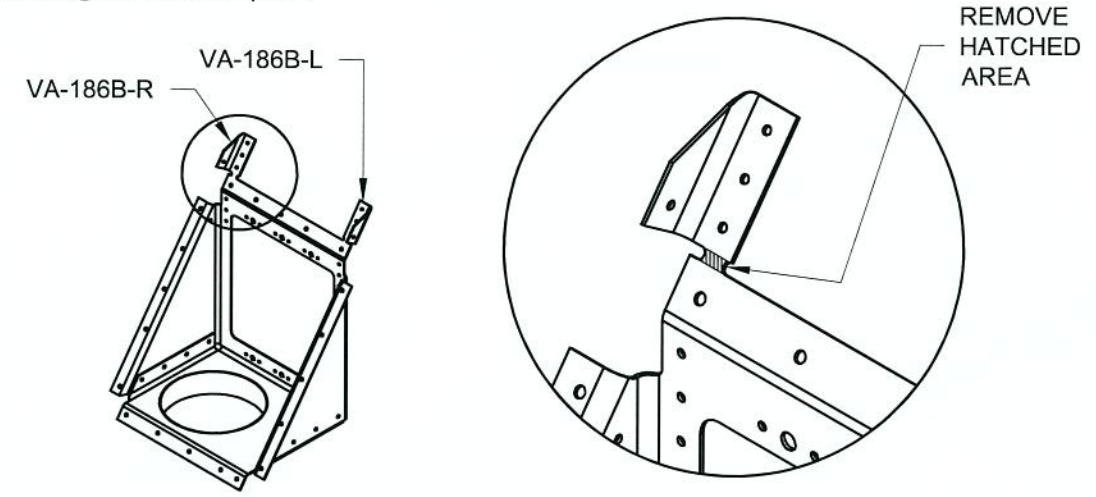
SEPARATING THE GUSSETS FROM THE OIL COOLER BOX
